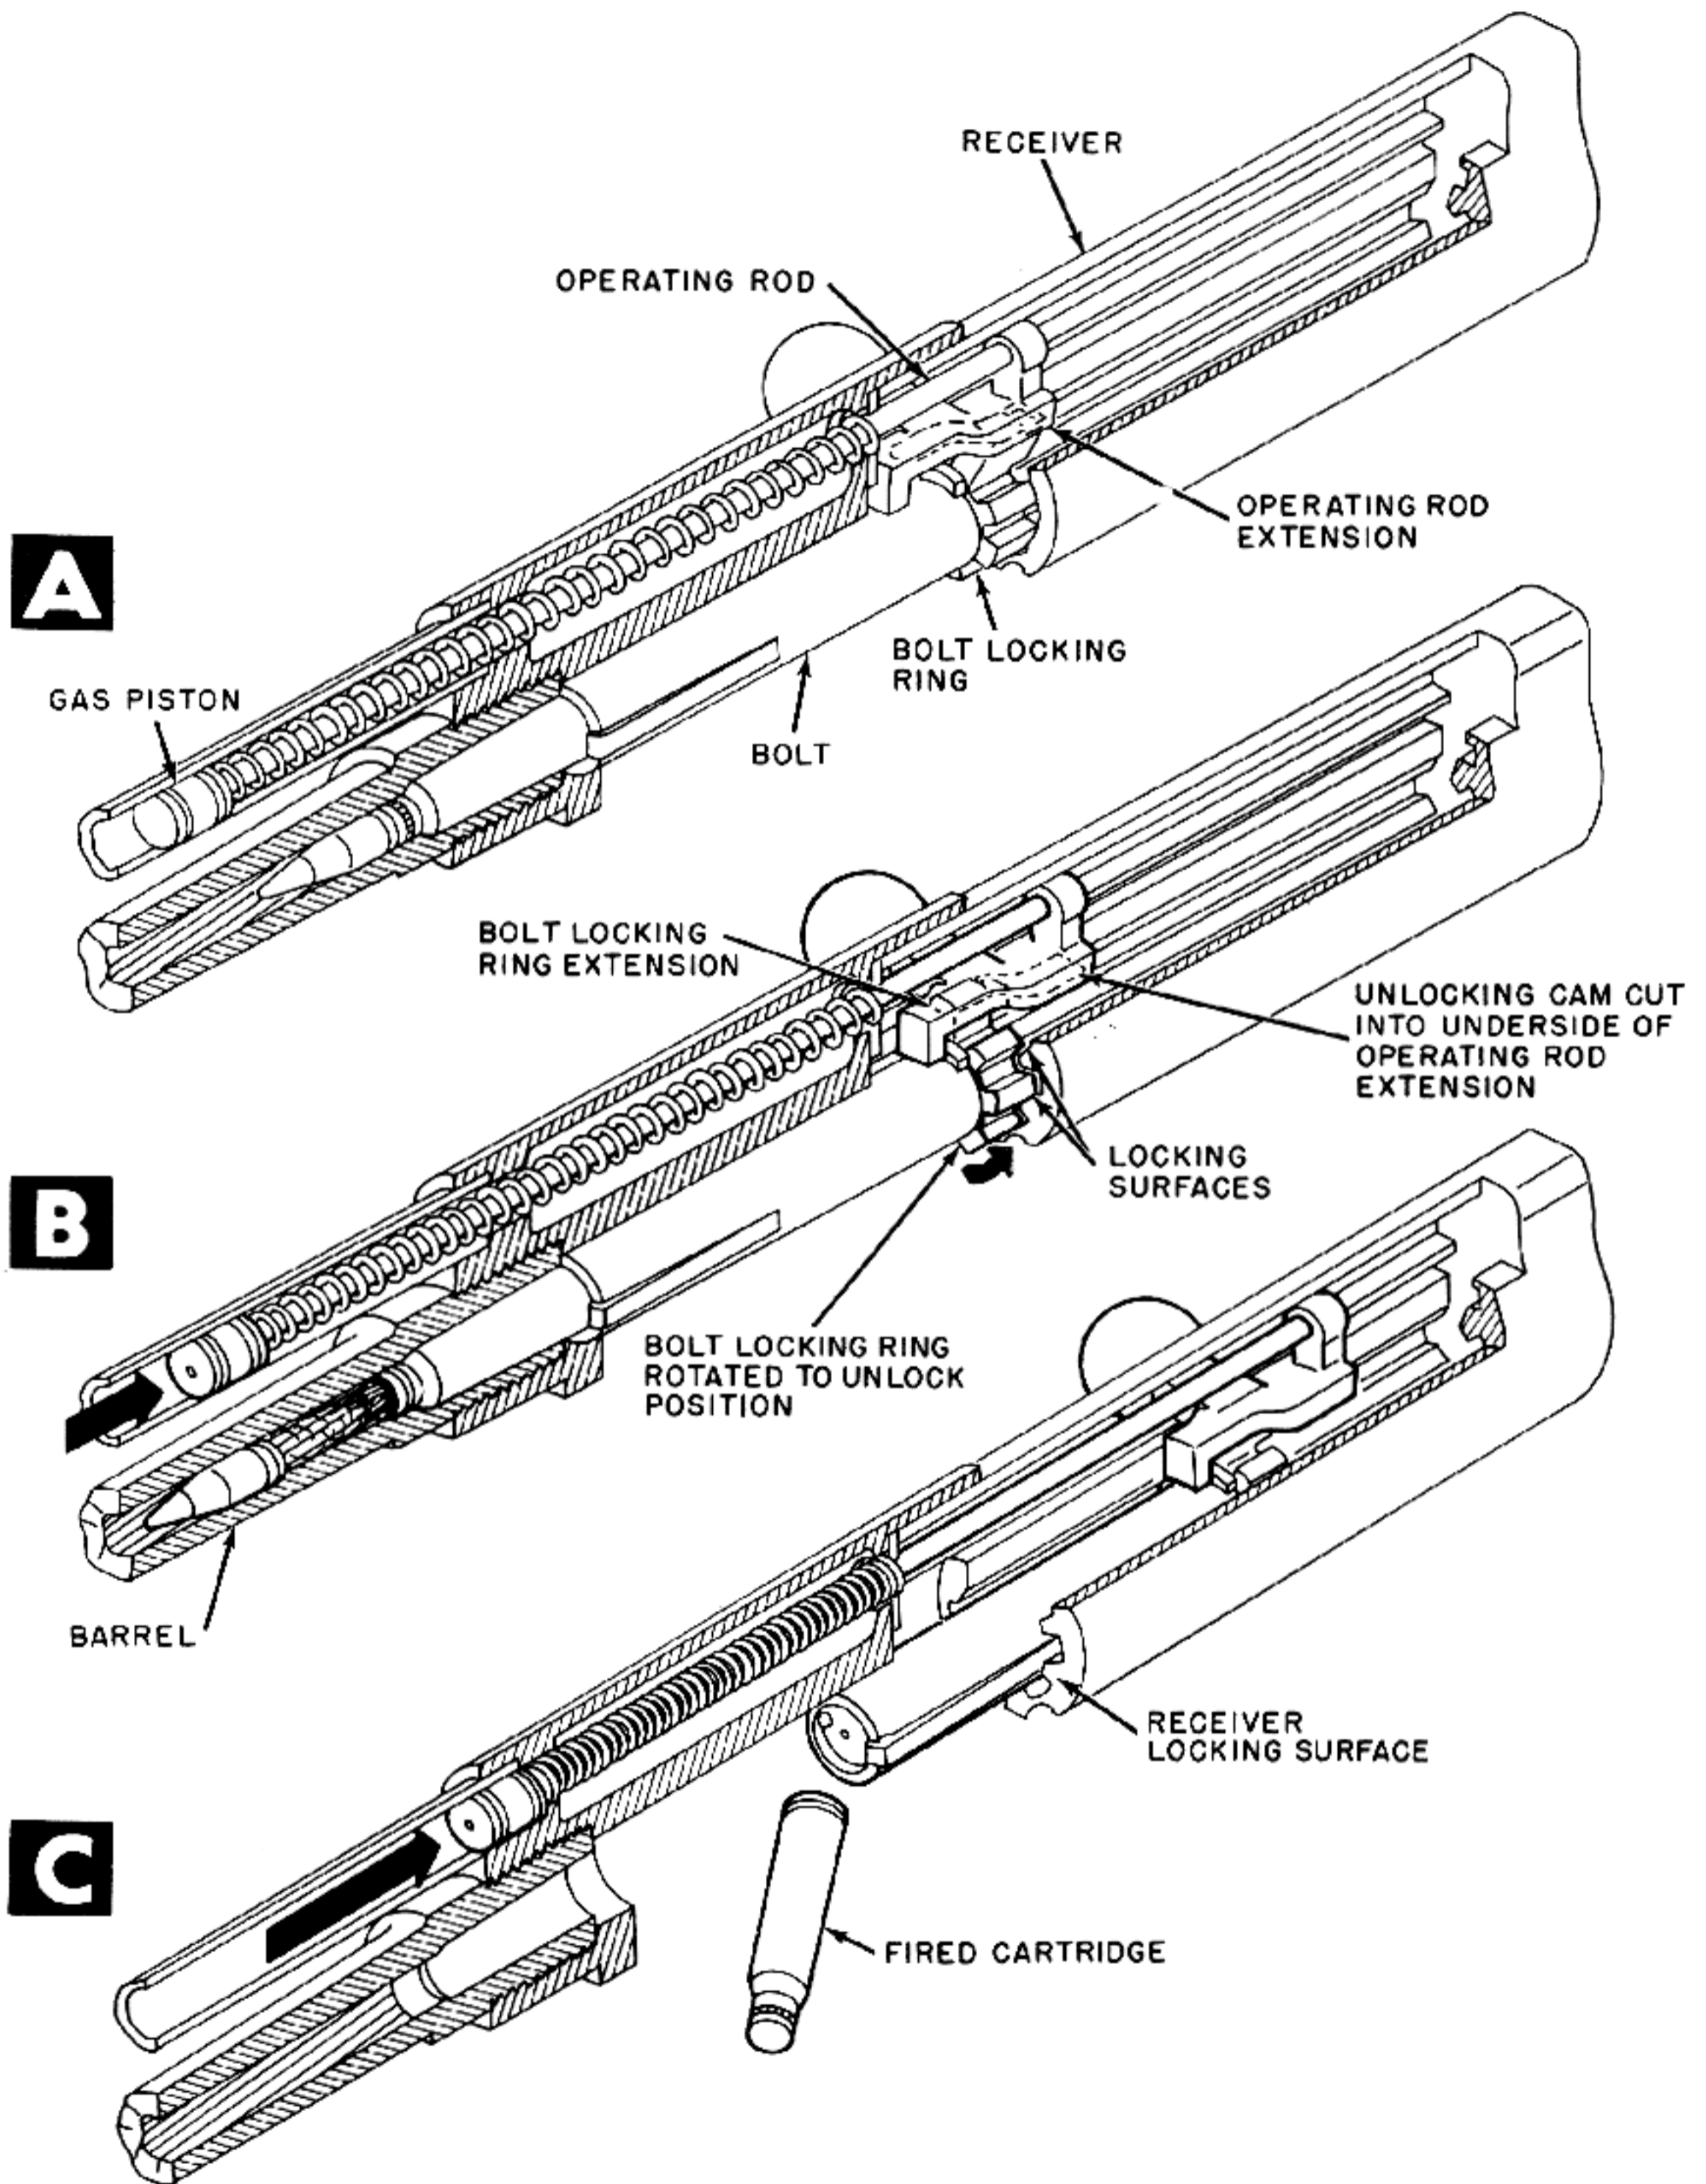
Cam on Operating Rod Rotates Bolt Locking Ring.
